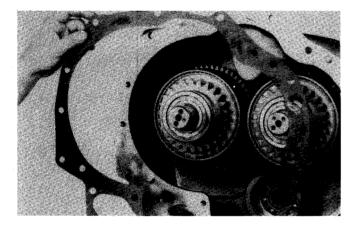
Position new gasket and "O" rings on housing. A light coat of grease will hold gasket and "O" rings in place.
